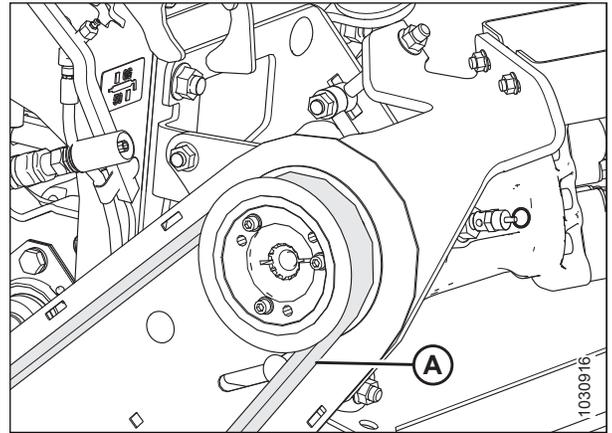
Drive Pulley – Conditioner Drive Motor
